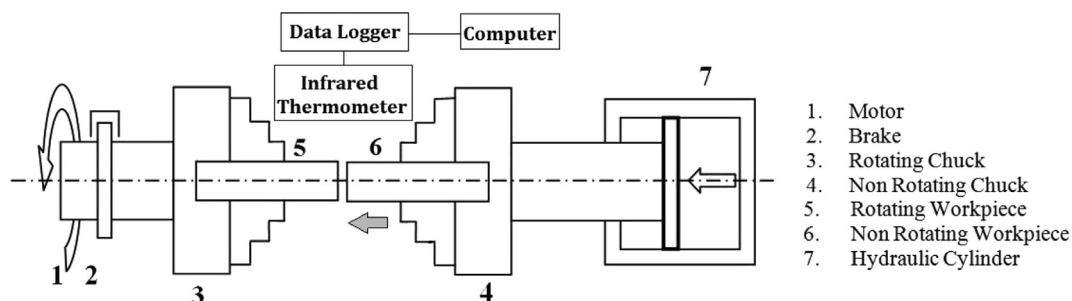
Experimental setup of continuous drive friction welding.
